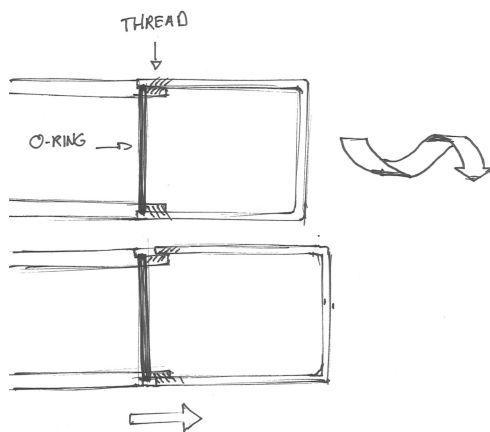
By rotating the bottom half over the thread, the o-ring seal is broken.
